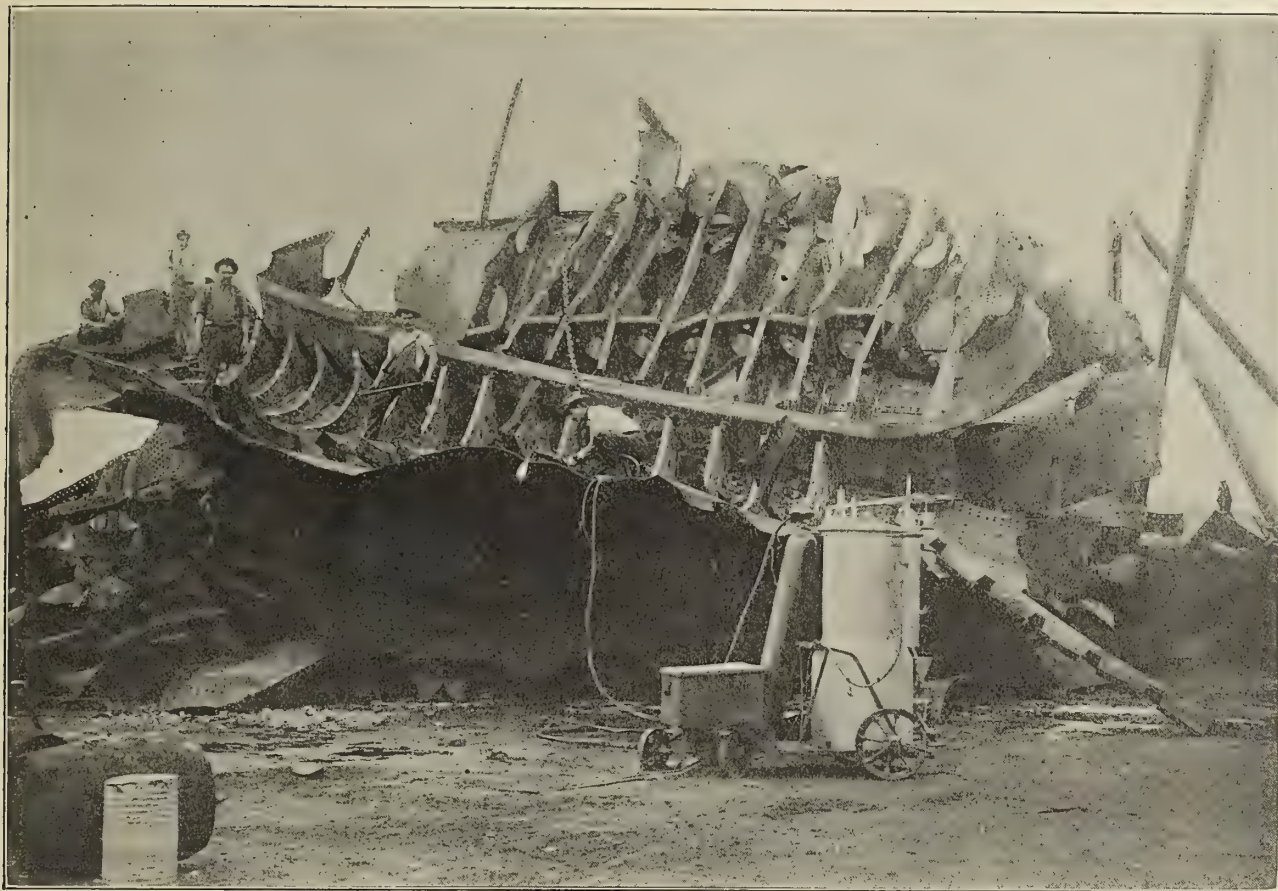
Torch Operator Cutting Apart Bottom Plating of Wrecked Vessel
